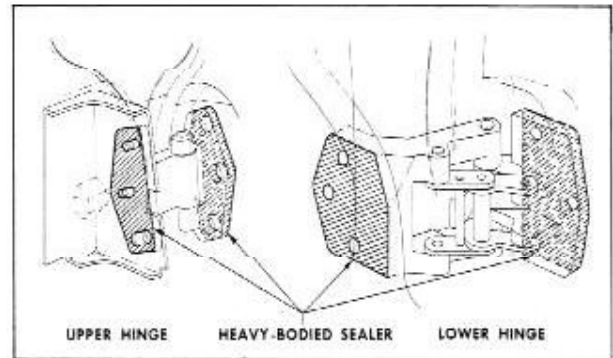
Rear Door Hinge Anti-Squeak Sealing
